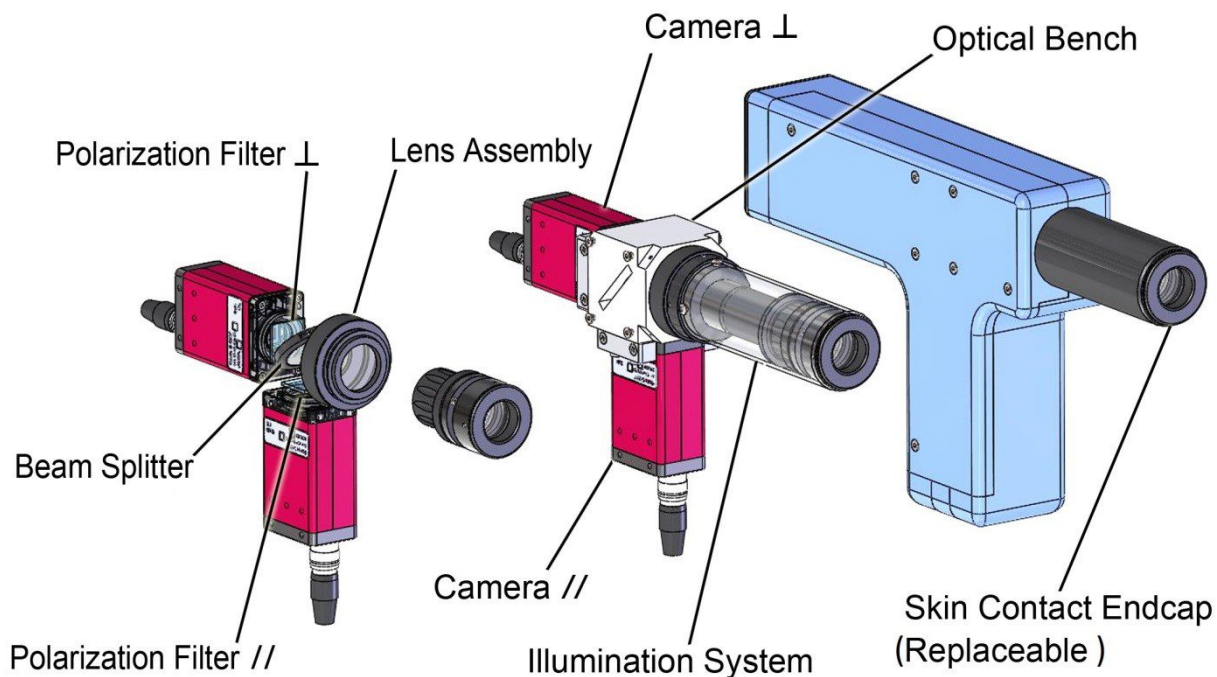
SkinSpect dual-camera hand-piece prototype design.
